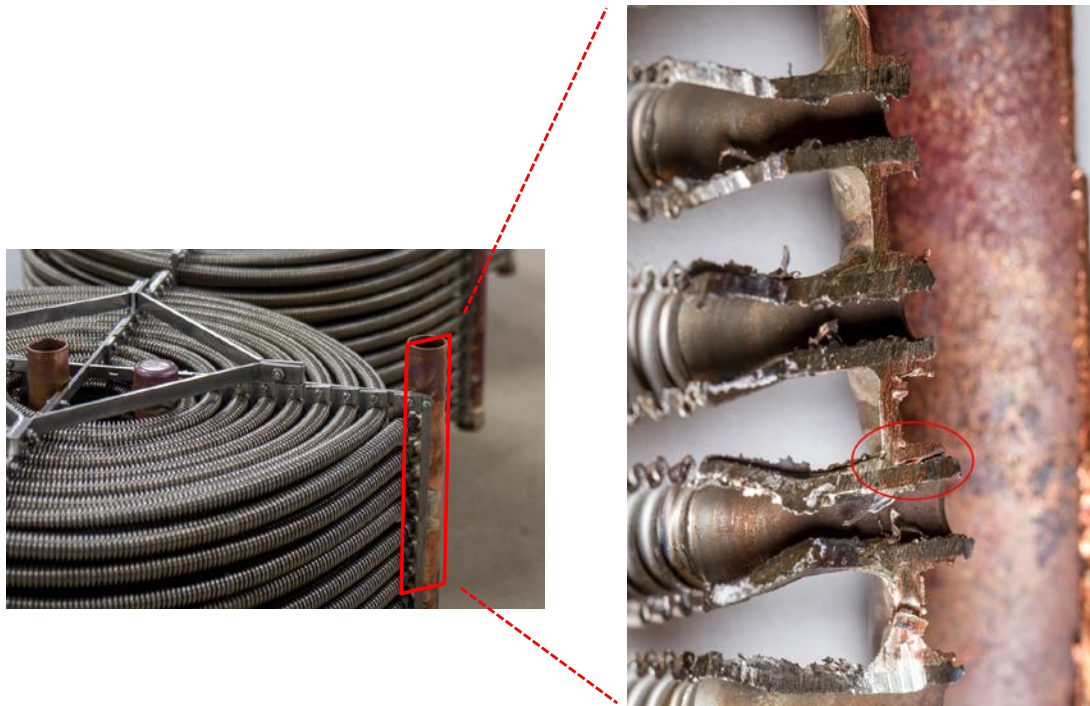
E/C spiral heat and mass exchanger module (left) and cut of its manifold showing the copper/stainless-steel junction with one crack (right).
